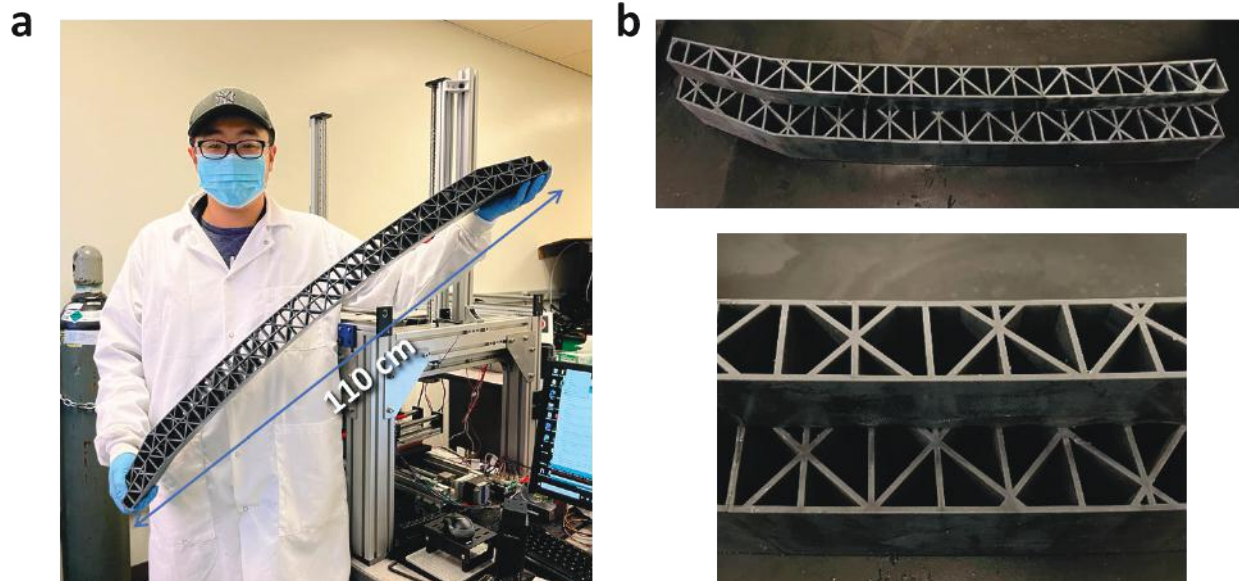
(a) 3D printed hollowed car bumper with a length of 110 cm. (b) Each half (~55 cm) was printed separately and bonded together to make a full-size (110 cm) bumper. Source: ORNL.
